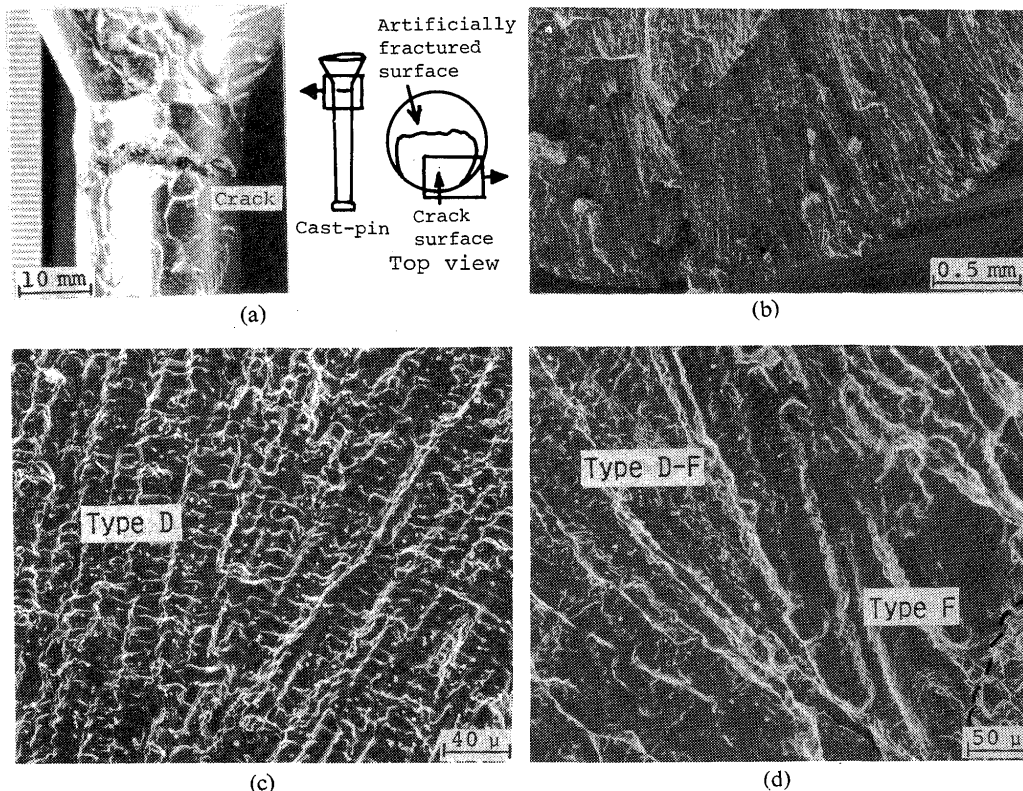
Typical crack and its fracture surfaces in SUS 310S-I (0.14%Ti) cast-pin: (a) crack in cast-pin; (b), (c), (d) SEM micrographs of crack surfaces, showing characteristics of solidification cracking.
